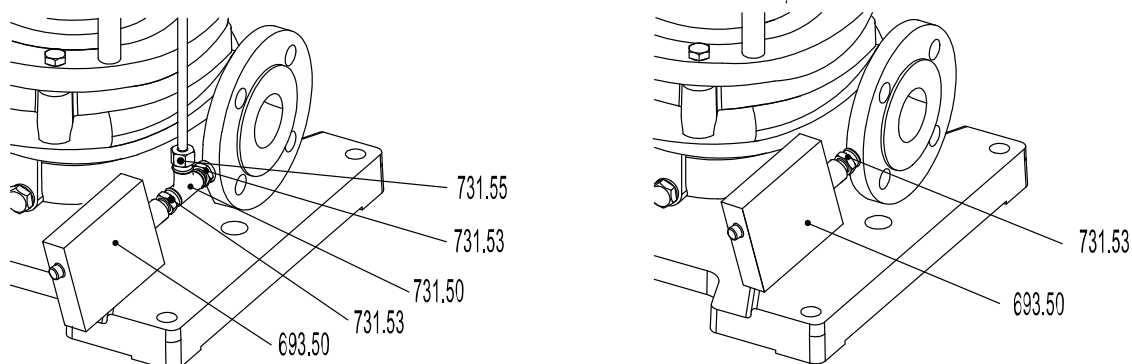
General assembly drawing, venting system with ejector, ILNE/ILNCE
